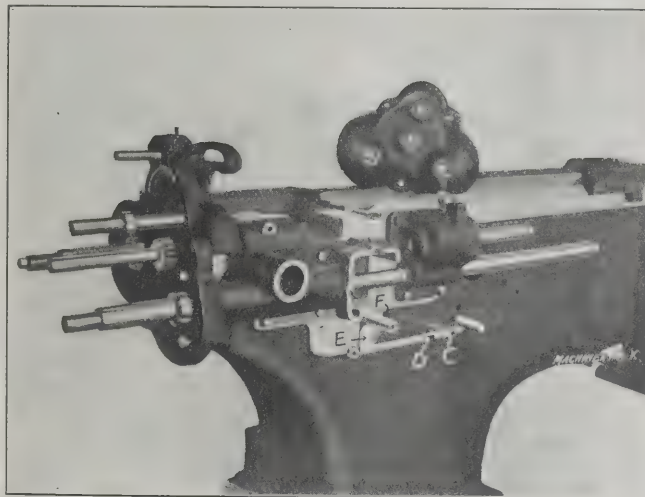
Method of Aligning Bracket and Feed Box on the Head End of a Turret Lathe
